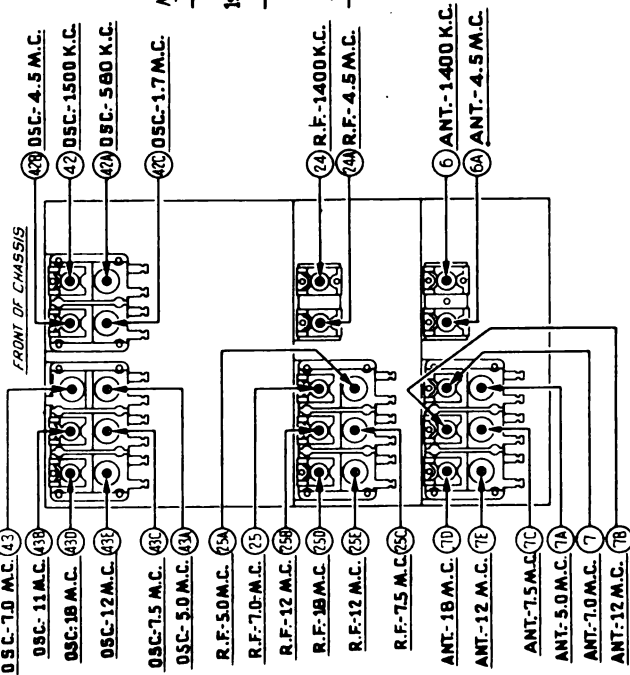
Locations of R.F. Compensators Underbelde of Chassis View
